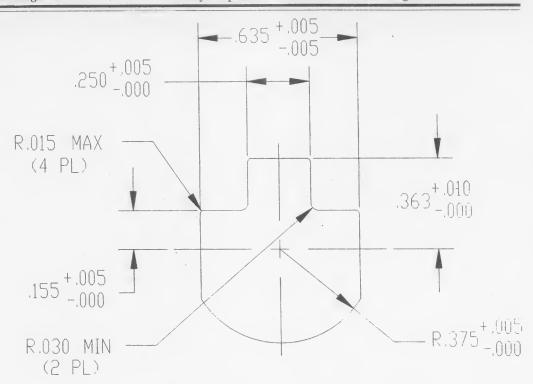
Mounting Hole, PSIN 0910 Customer Lock
